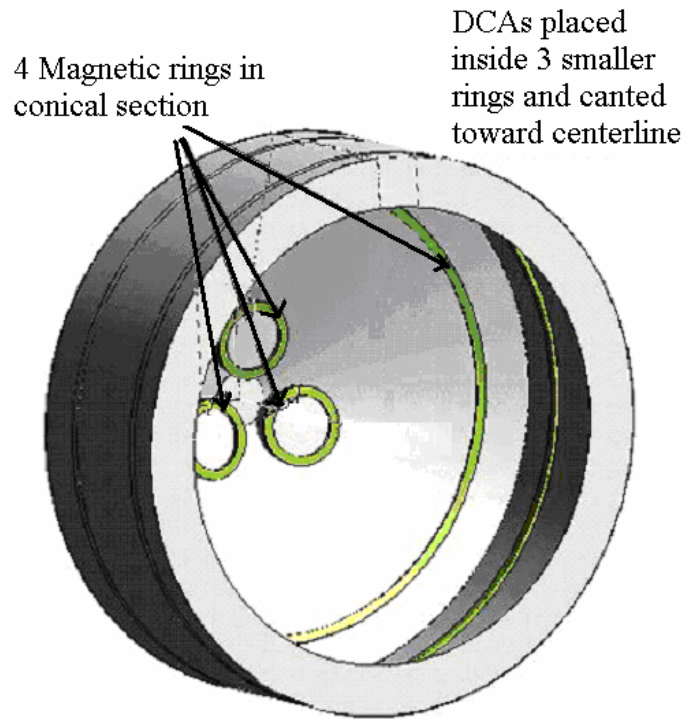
Example conical model with 4 backplate ring magnets. DCAs placed inside the 3 smaller inner rings.
